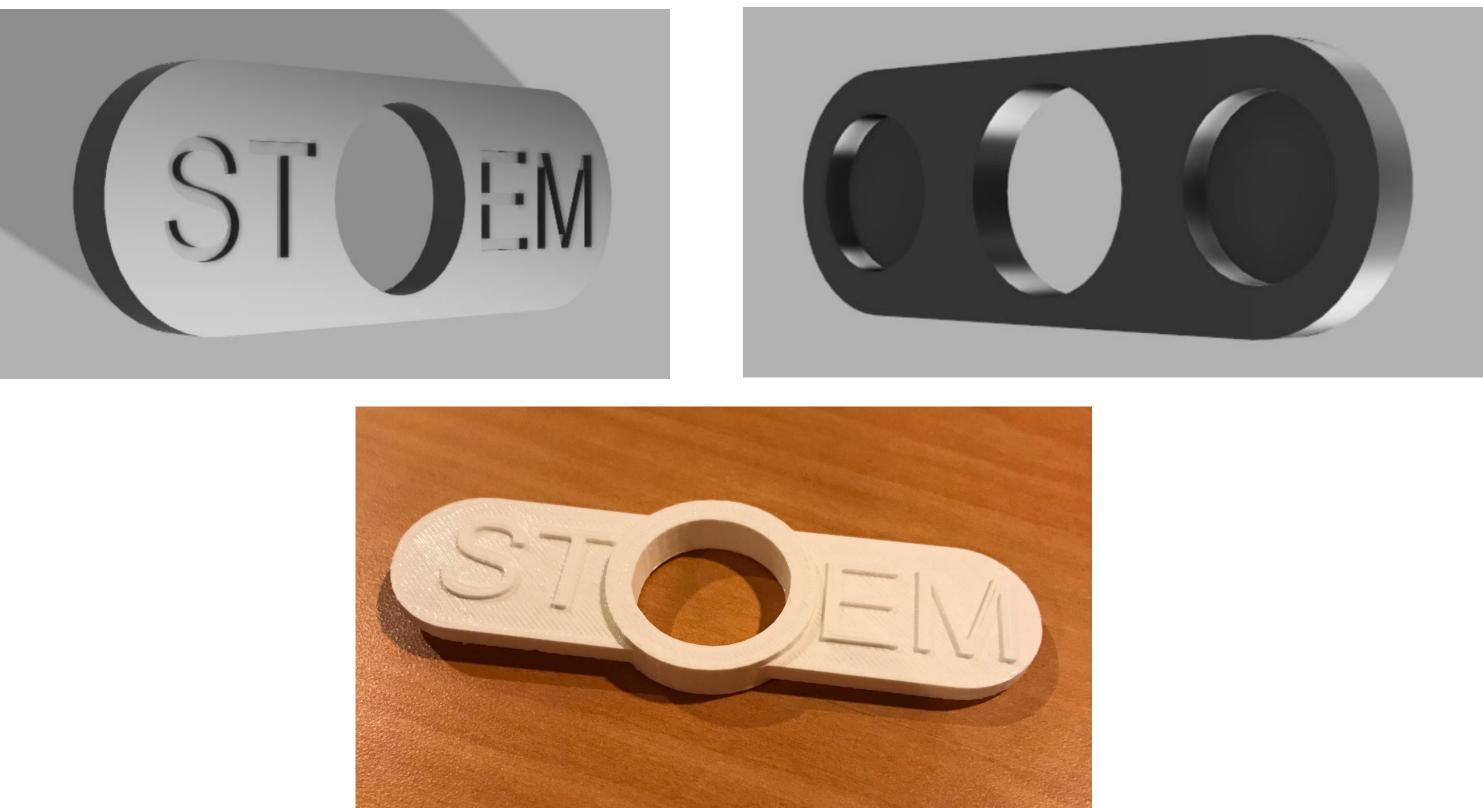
Spinner toy with "STEM" letters: front of spinner (top left), back of spinner (top right) which has two holes to hold two nickels each as weight, and first physical prototype (bottom).
